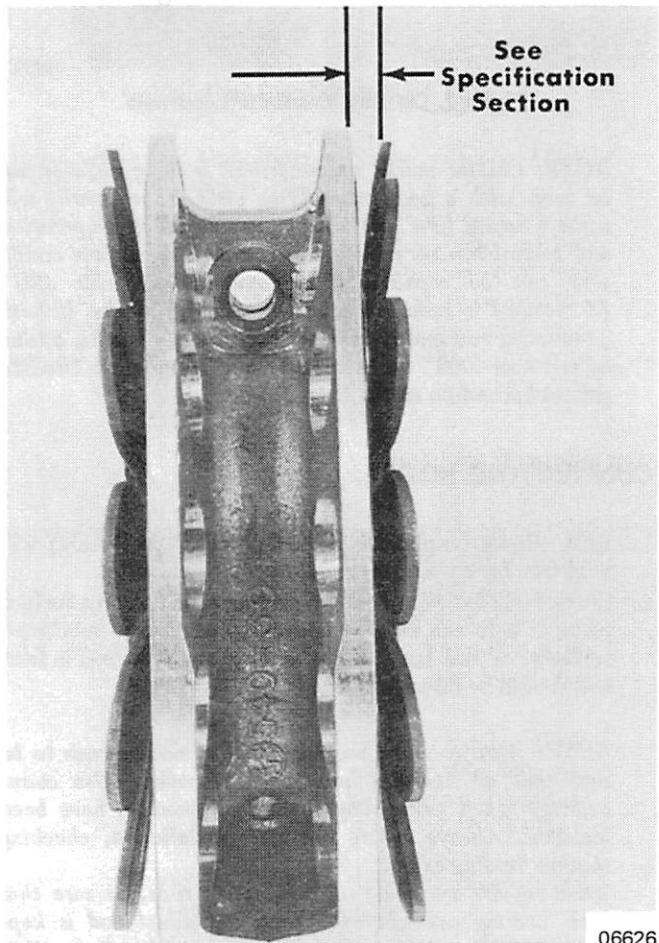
Reed Valve Stop Opening - 4 and 6-Cylinder
